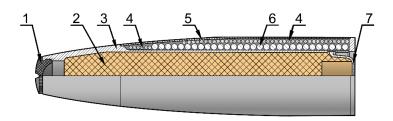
Main parts of the 128 mm HE warhead with a base detonating assembly: (1) fuze well closing plug, (2) explosive charge, (3) warhead body, (4) smaller steel balls, (5) liner, (6) larger steel balls and (7) warhead base
